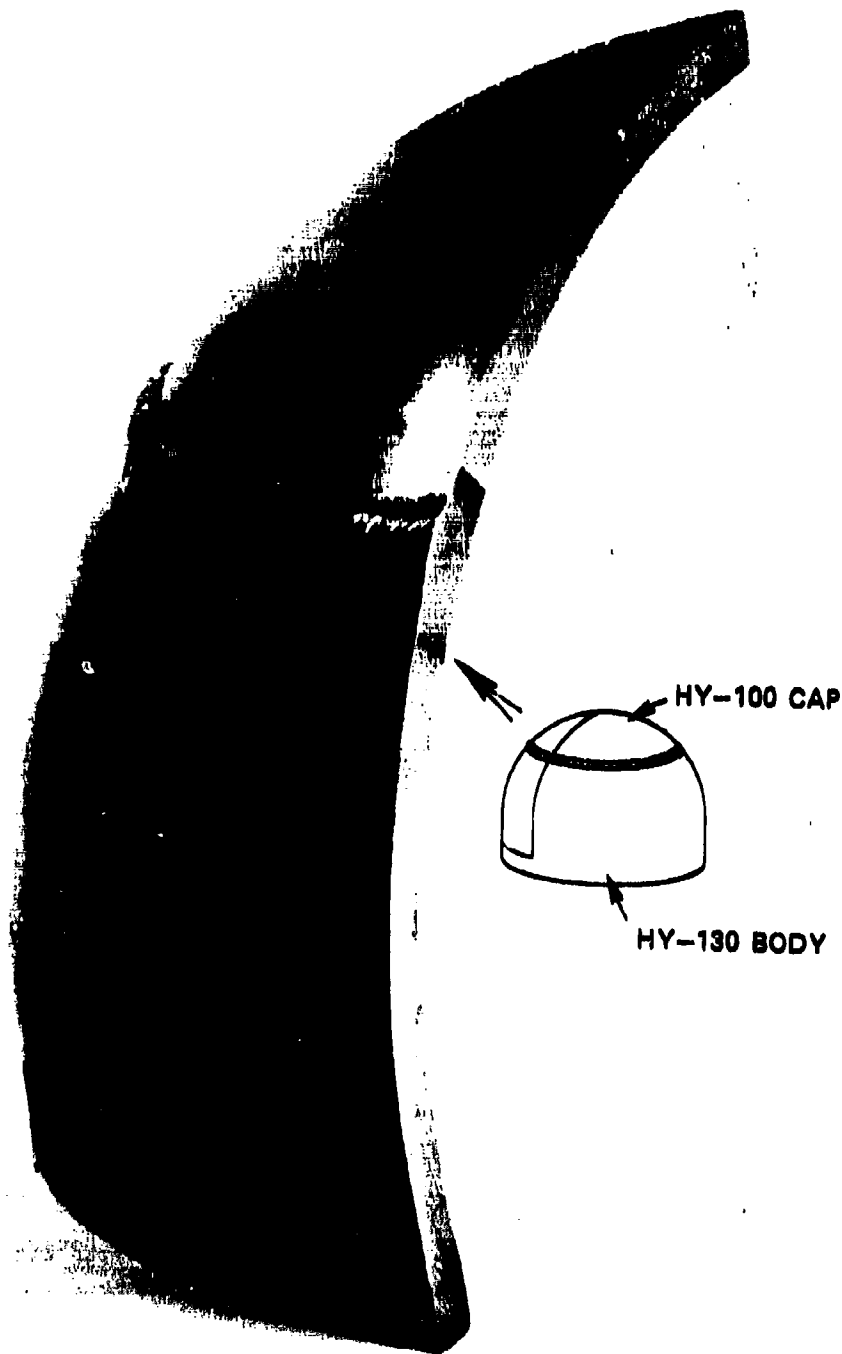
PAM Weld in HY-100/130 Test Model
